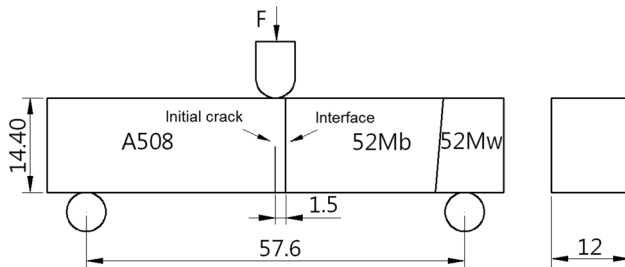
Loading configuration and geometry of the SENB specimen (for the crack 2 specimen)
